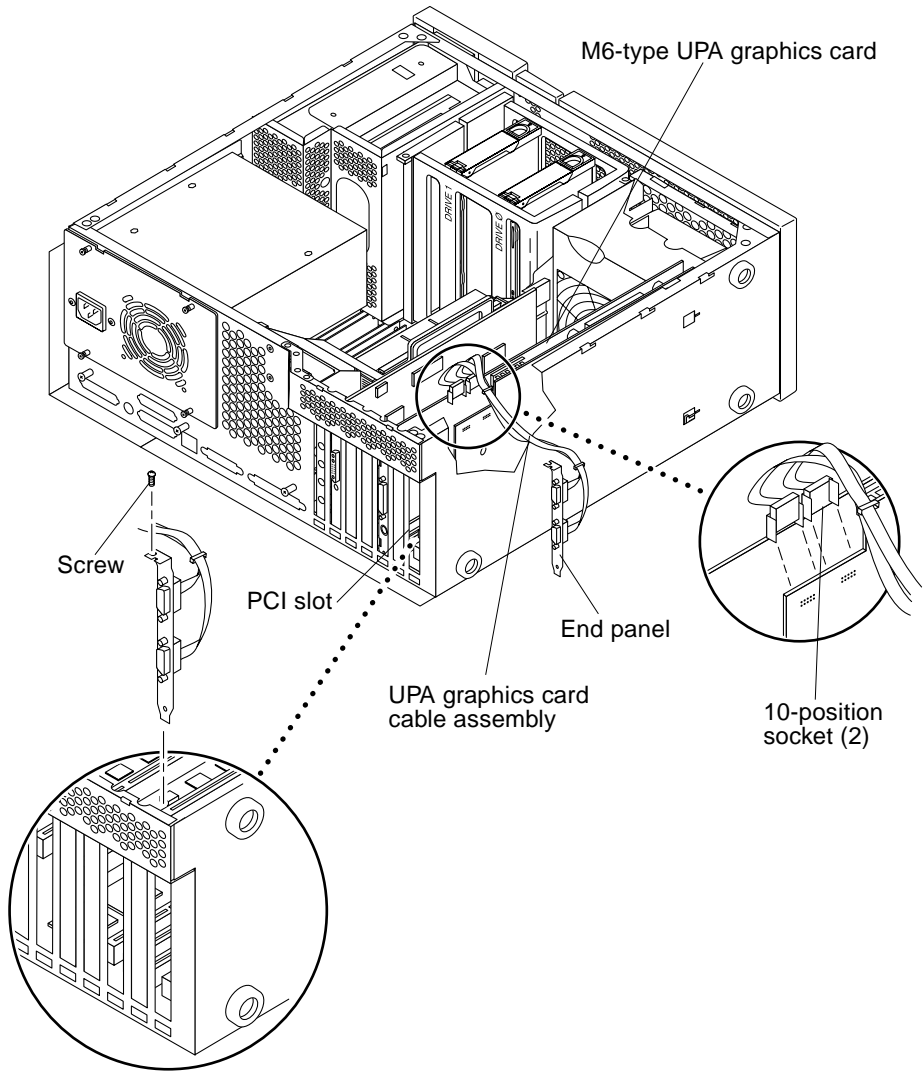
Removing and Replacing the UPA Graphics Card Cable Assembly
